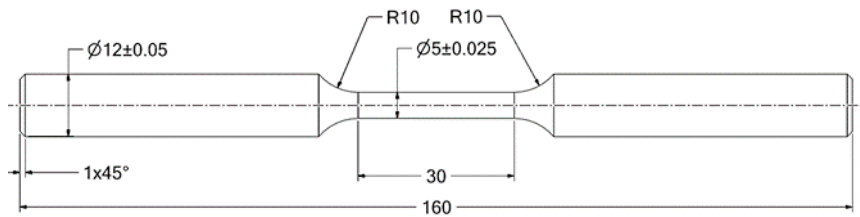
Geometry and dimensions (mm) of tensile specimens.
